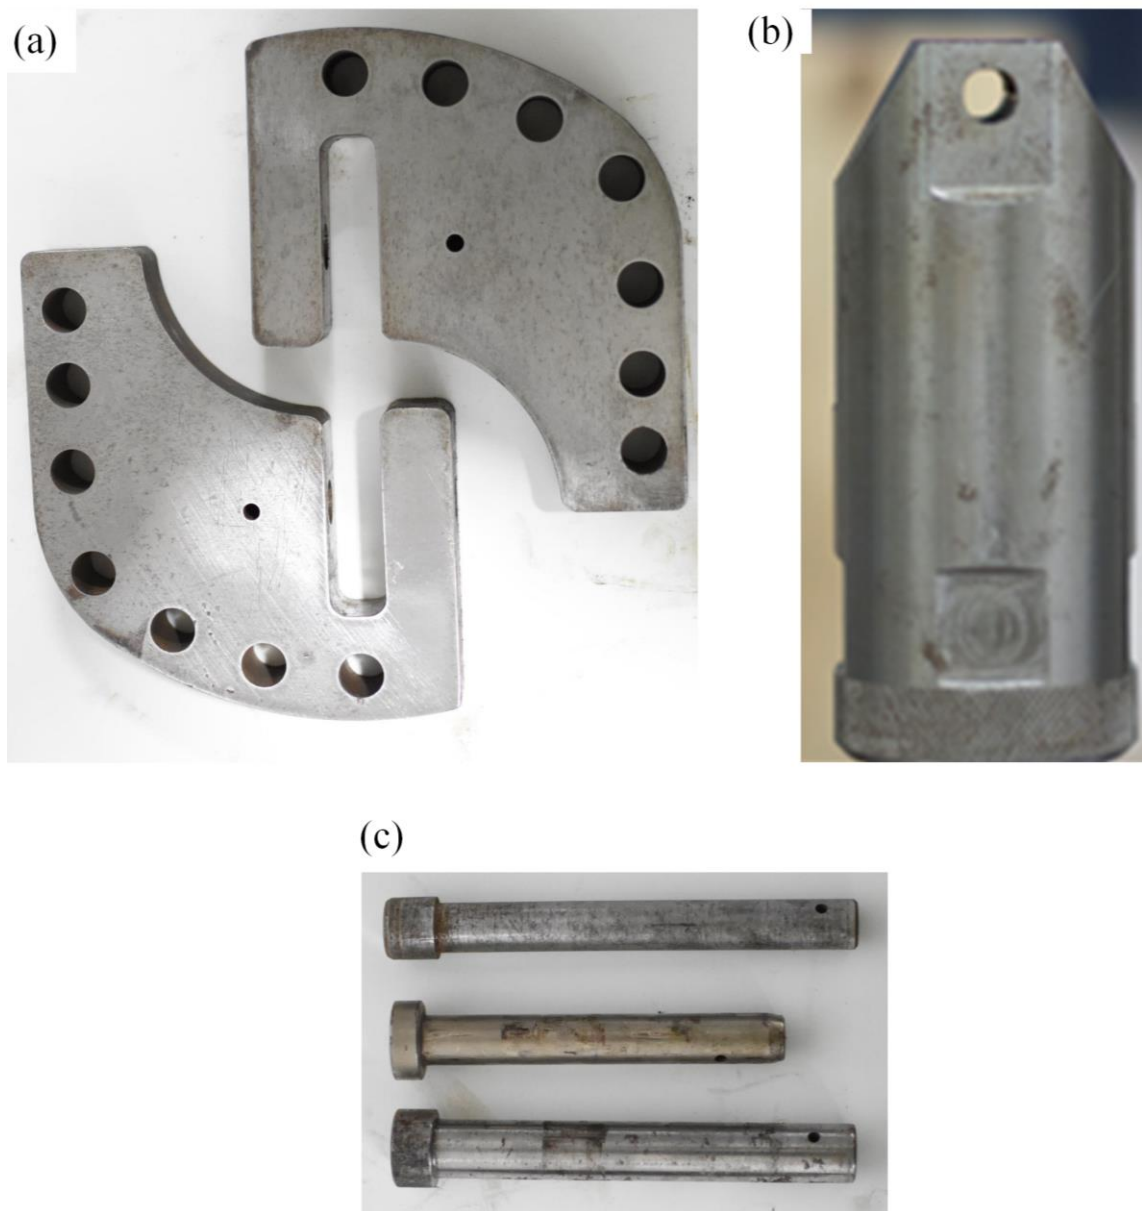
Fabricated (a) J-fixture. (b) Deep groove Clevis grip. (c) Loading pins.
